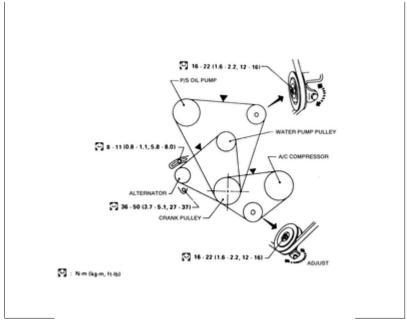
Drive belt tension inspection and adjustment points — KA24E engine
